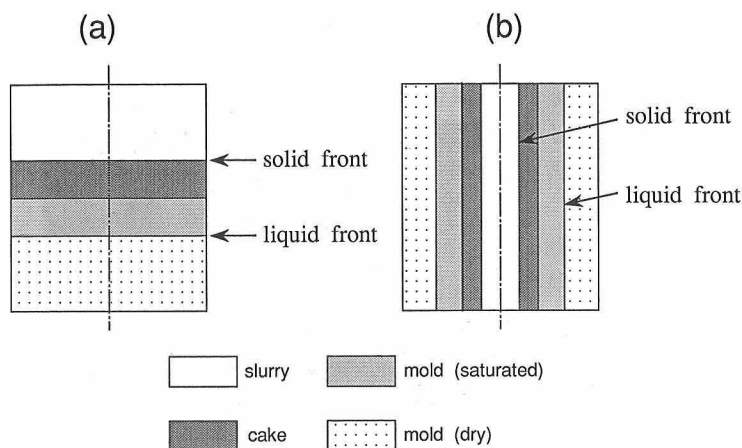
Schematic cross-sectional views of the ideal filtration in cylindrical mold systems, illustrating (a) vertical deposition on a circular surface and (b) inward deposition on a cylindrical surface.
